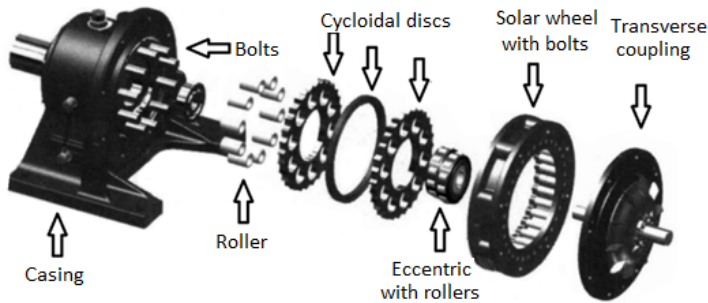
Cycloidal gear with bolts - assembly parts [5]
